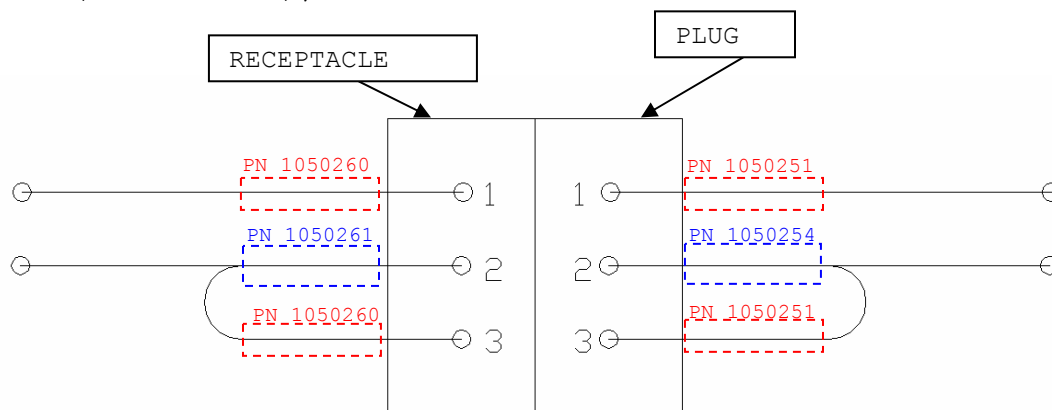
SOLDERED WIRE CONFIGURATION FOR CONNECTORS WITH BOOT SEAL PART NUMBERS
